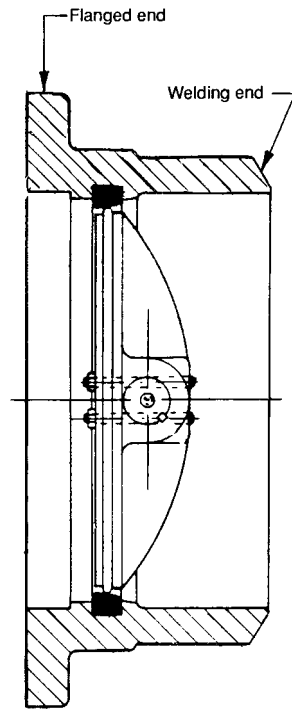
Butterfly valve; welding end on one end.
